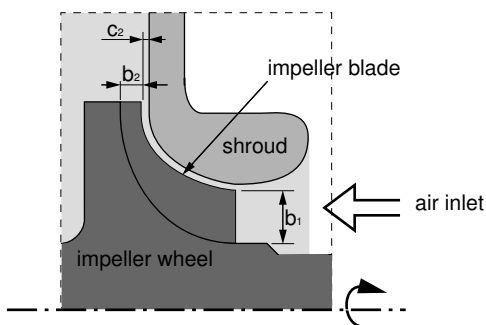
Simplified sectional view of compressor-turbine rotor group and compressor casing.
